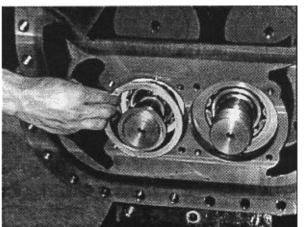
Removing the Thrust Spacer and Adjusting Spacer.
